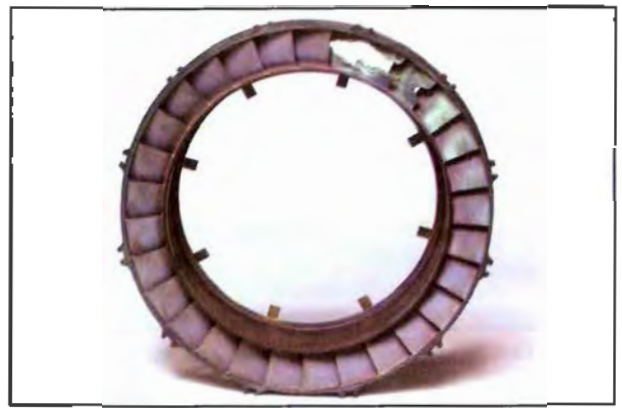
The extreme damage on this turbine inlet guide assembly was caused by a cracked and misaligned fuel nozzle which resulted in fuel nozzle streaking. When damage is this extensive, the compressor turbine (CT) blades must be replaced, and the disk inspected for excessive heat damage.
